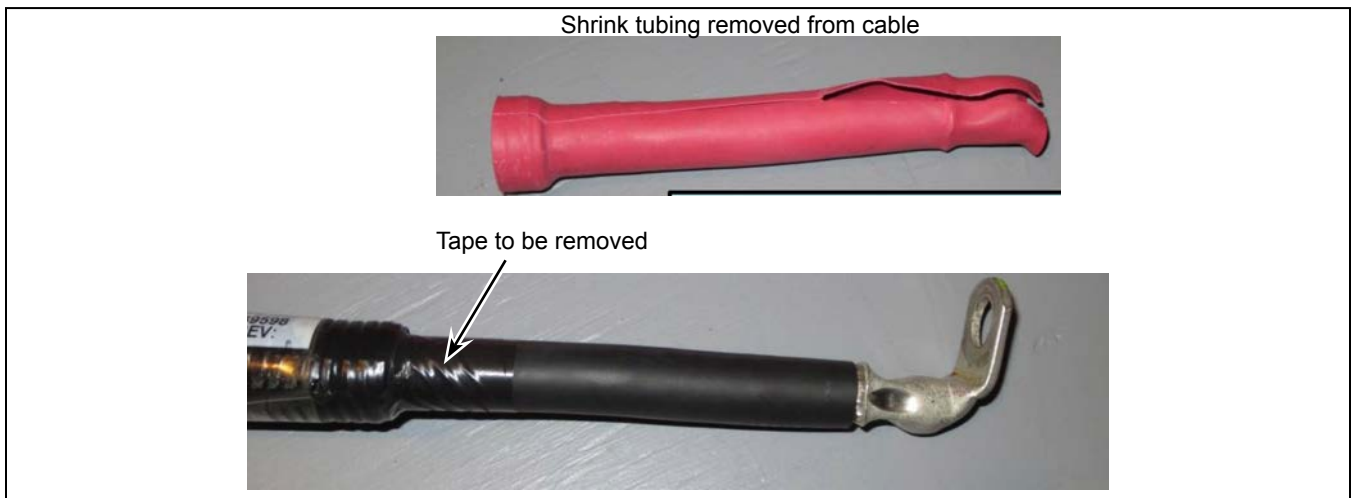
Red Shrnk Tubing and Tape to be Removed from Cable
